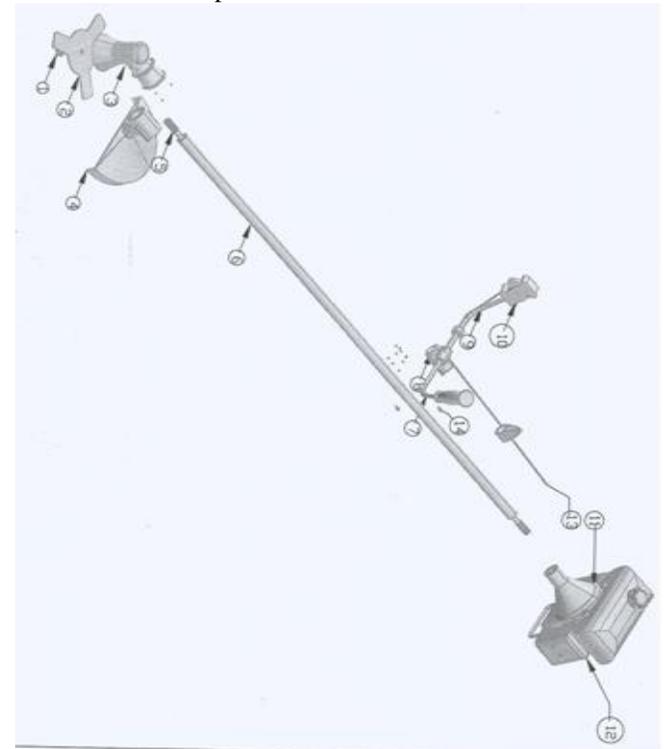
Exploded assembly drawing of hand-held grass mowing machine
